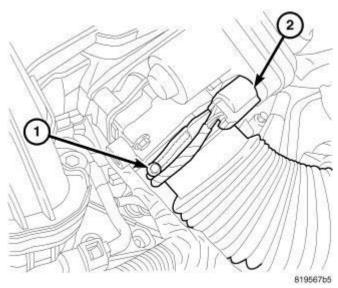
Air Cleaner Housing & Inlet Hose Courtesy of CHRYSLER LLC
